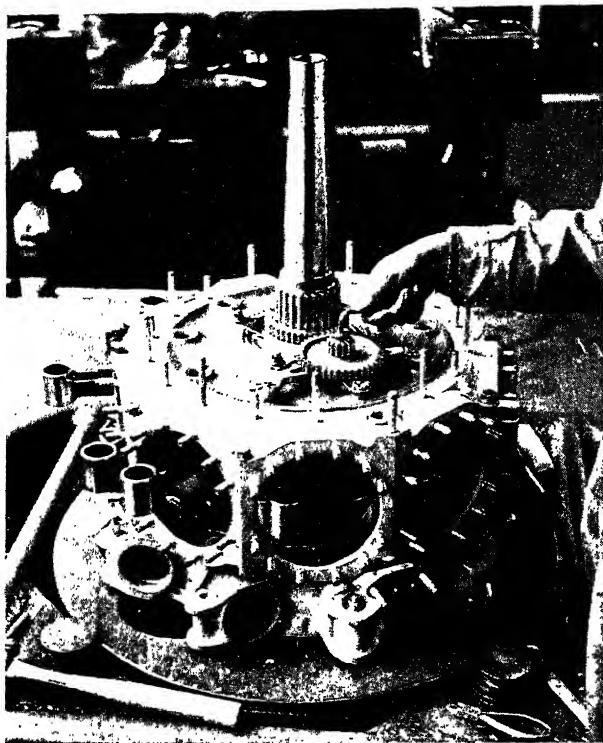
FITTING CAM REDUCTION-GEAR NUT
